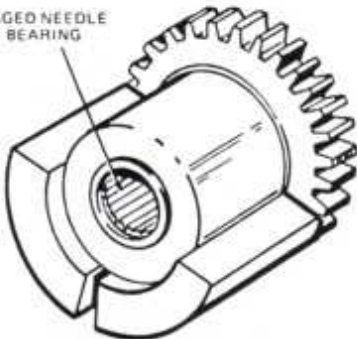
Using tool #670210, press new needle bearings into Model HM80, VM80, HM100 or VM100 balancer gears until bearing cage is flush to 0.015 inch (0.381 mm) below edge of bore.
